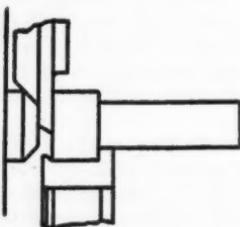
An Accurate Full-Size Layout of the Work and Chuck Enables the Tool Designer to Determine Whether Alterations will be Required on the Lead Cam
